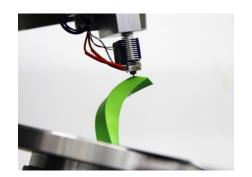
Multi-axis printing on a seven-axis FDM machine developed at the University of Stuttgart.
